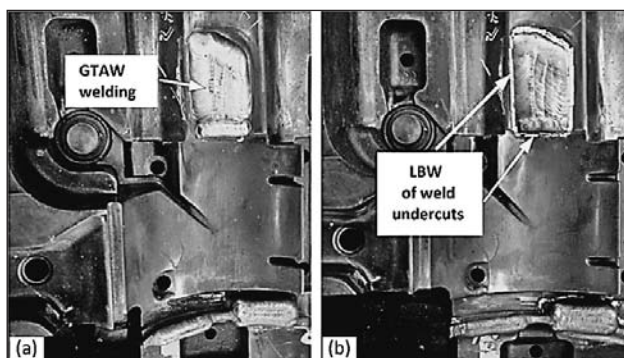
High pressure die casting die, a) GTAW of die surface and b) LBW of GTAW weld undercuts
